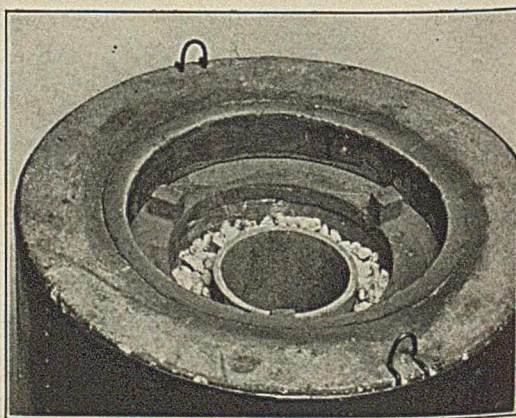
TOP VIEW OF CRUCIBLE FURNACE WITH COVER REMOVED
